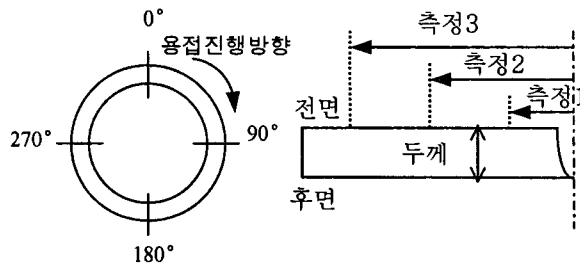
Measuring Position for Narrow-gap TIG Welding
